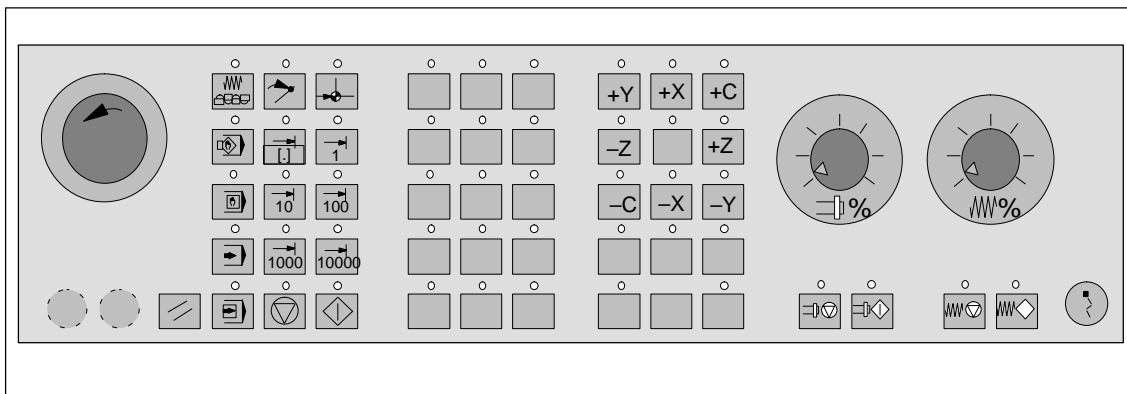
Machine control panel front side; example: Version T (turning machine)
